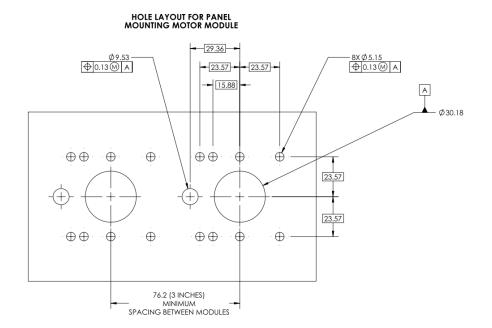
Panel Mount Microspense AP Motor Module Hole Layouts
